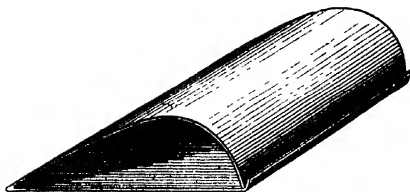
BENDING JIG FOR SHAPED PANELS
